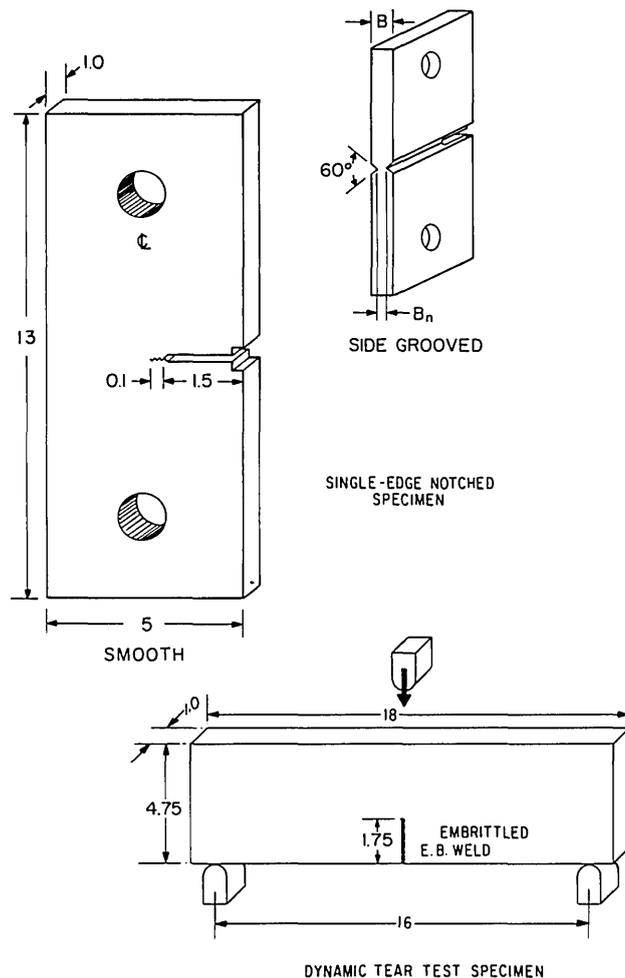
Smooth and side-grooved single-edge-notched (SEN) tension specimens used to measure K_{Ic} and the DT test specimen. All dimensions are in inches.
